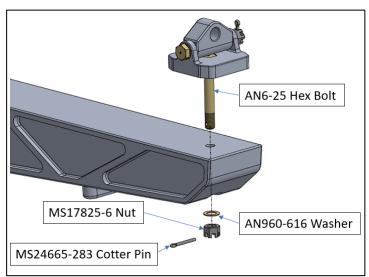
AFM-130-30-1 Aft Attachment Assembly Installation onto the AFM-130-10 Main Beam Assembly
